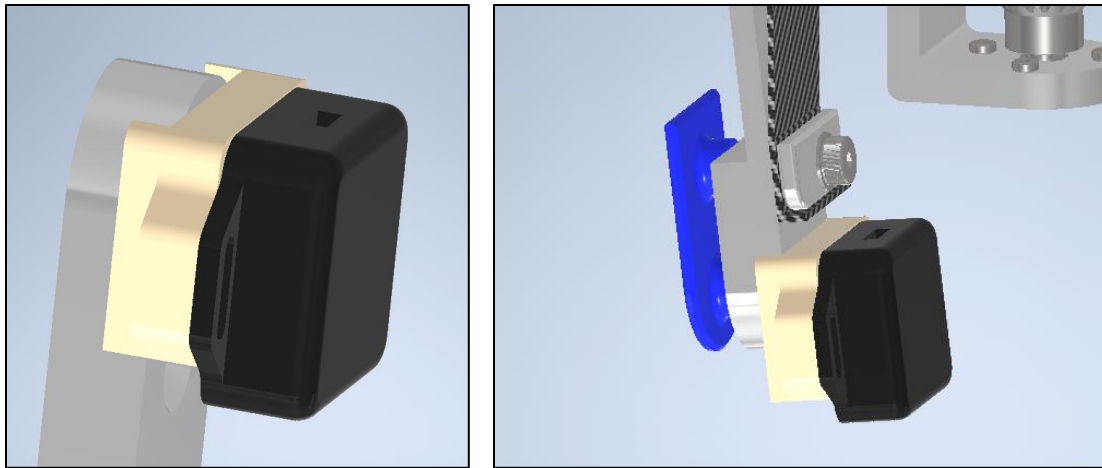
Mounting the IMUs. IMUs, shown in black, are mounted at (a) the upper end and (b) the lower end of the Al strut using custom designed 3D printed part (yellow).
